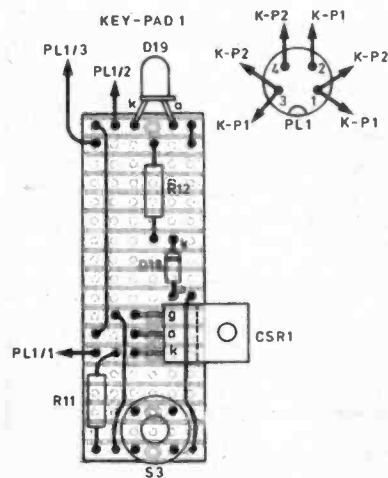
Component layout and wiring for a single key-pad. The thyristor CSR1 is mounted with the "metal face" uppermost. Note that the switch contacts are in "pairs".
